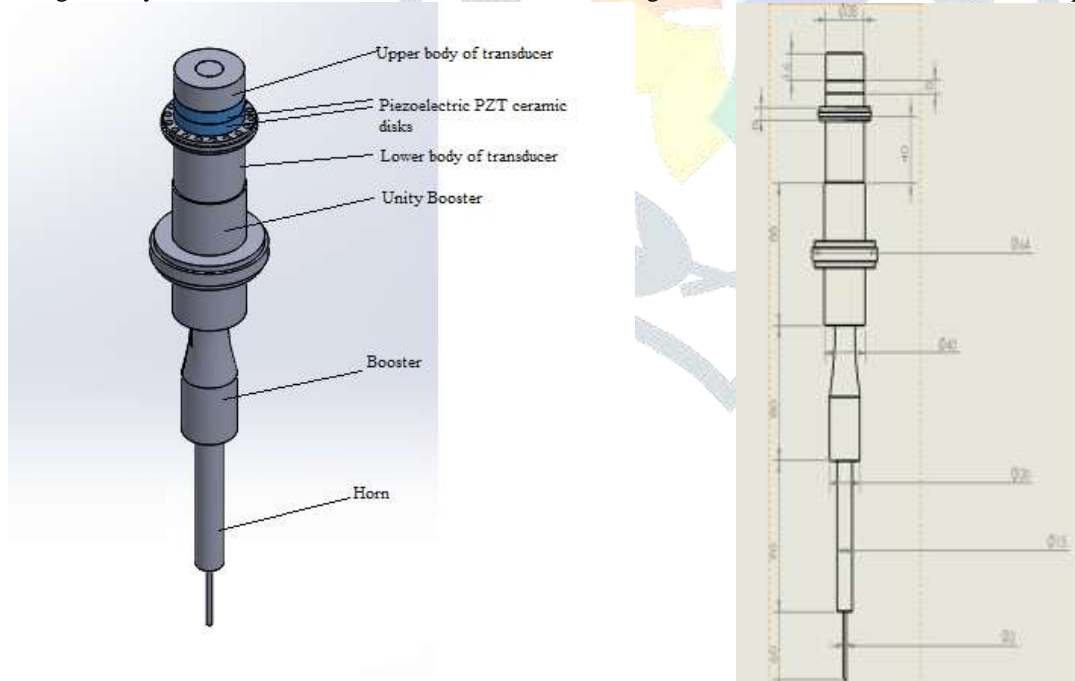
and 4 Design and dimensioning of ultrasonic assembly
